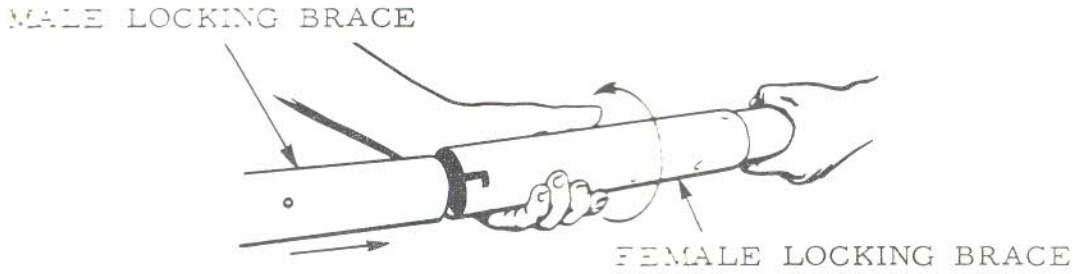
JOINING MALE AND FEMALE LOCKING BRACES
